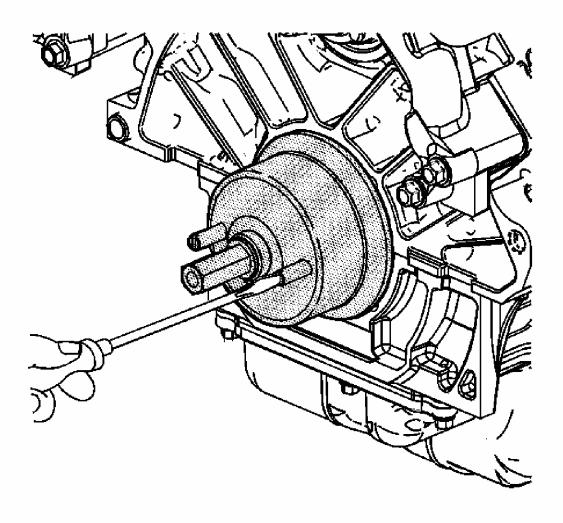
Loosening Seal Installer Mounting Bolts Courtesy of GENERAL MOTORS CORP.
